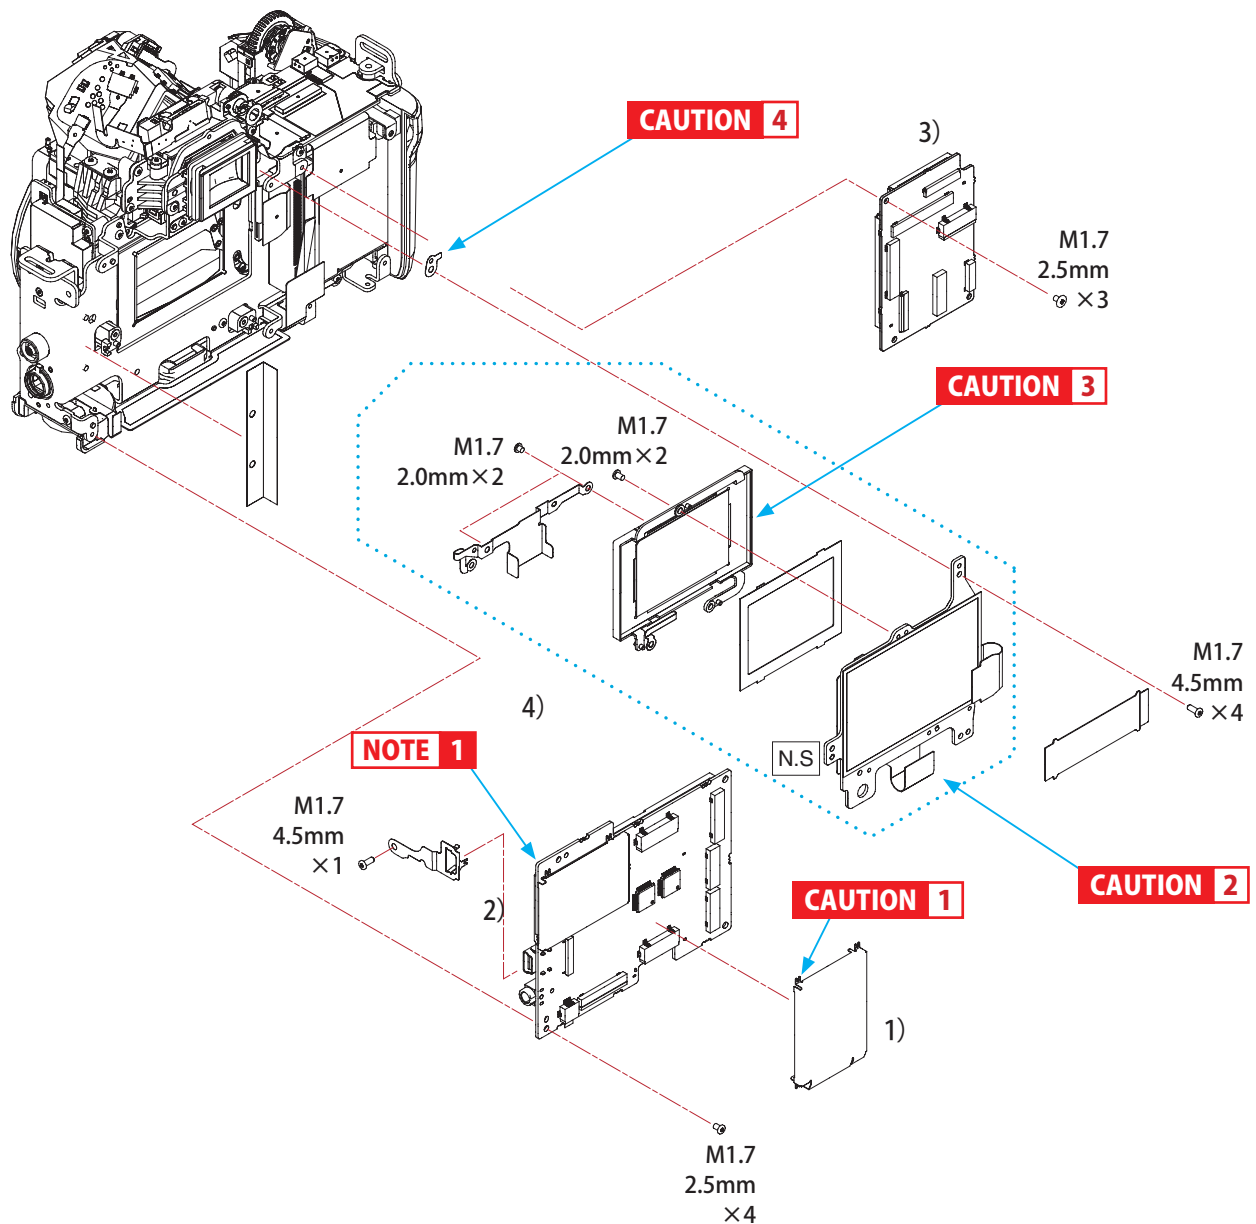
Digital PCB / Camera PCB / Imaging Unit Removal
